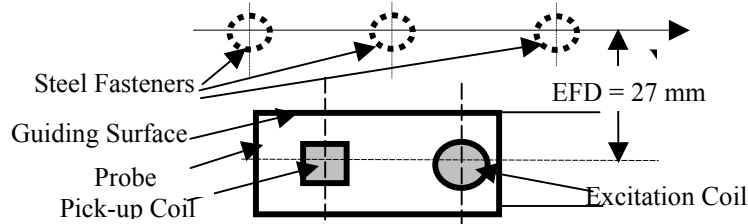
Probe arrangement for scanning steel fastener holes, Holes 7 and 8.
